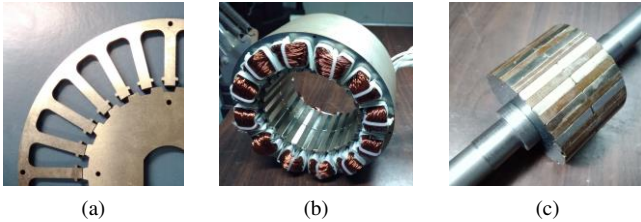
(a) Lamination steels. (b) Stator assembly. (c) Rotor assembly.
